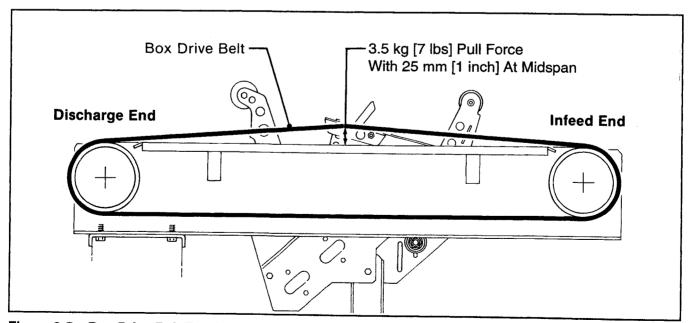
Box Drive Belt Tension Adjustment, Lower Belts (Left Side View)
